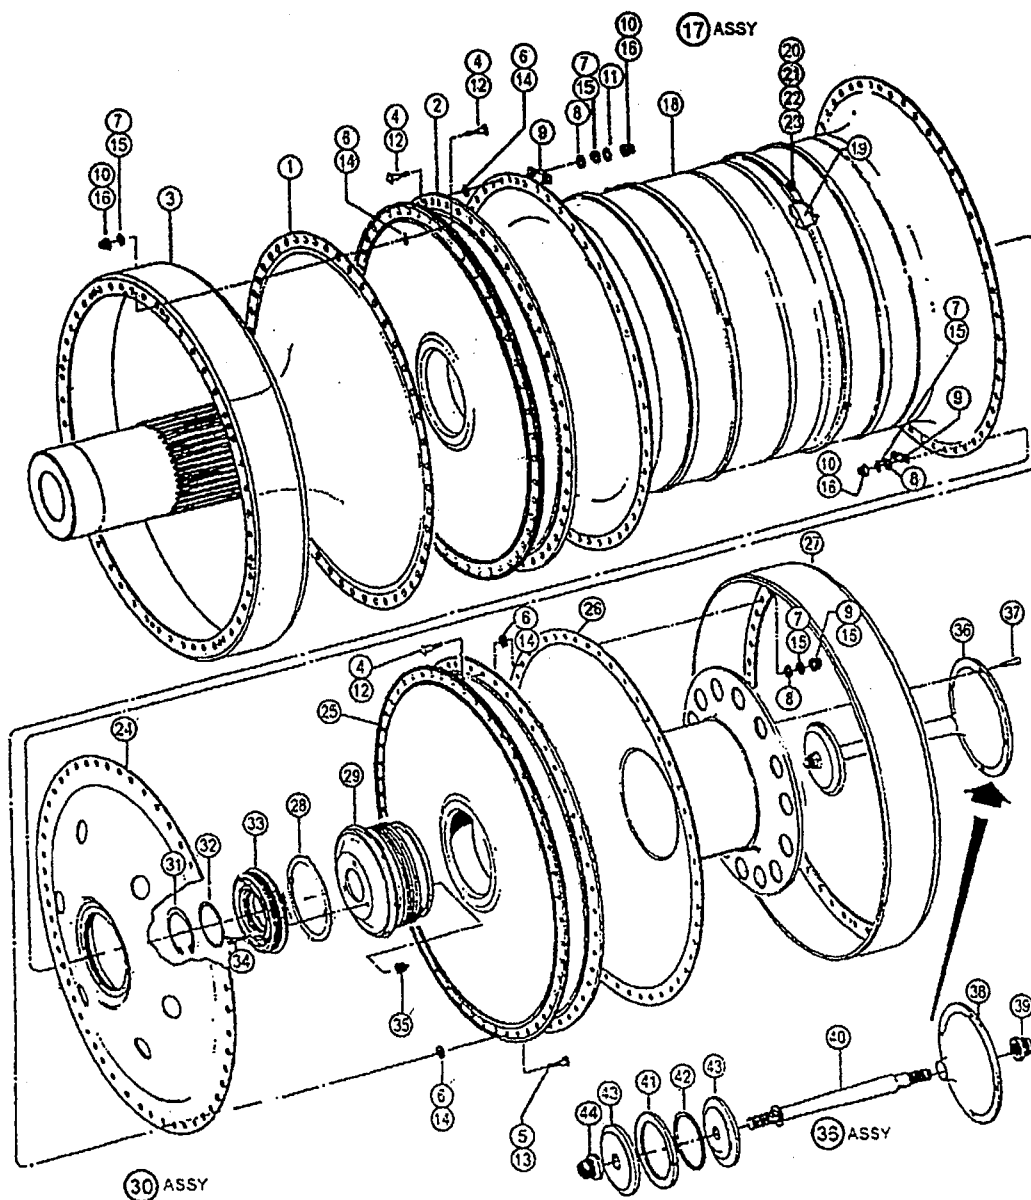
High Speed Coupling Shaft Assembly Breakdown
